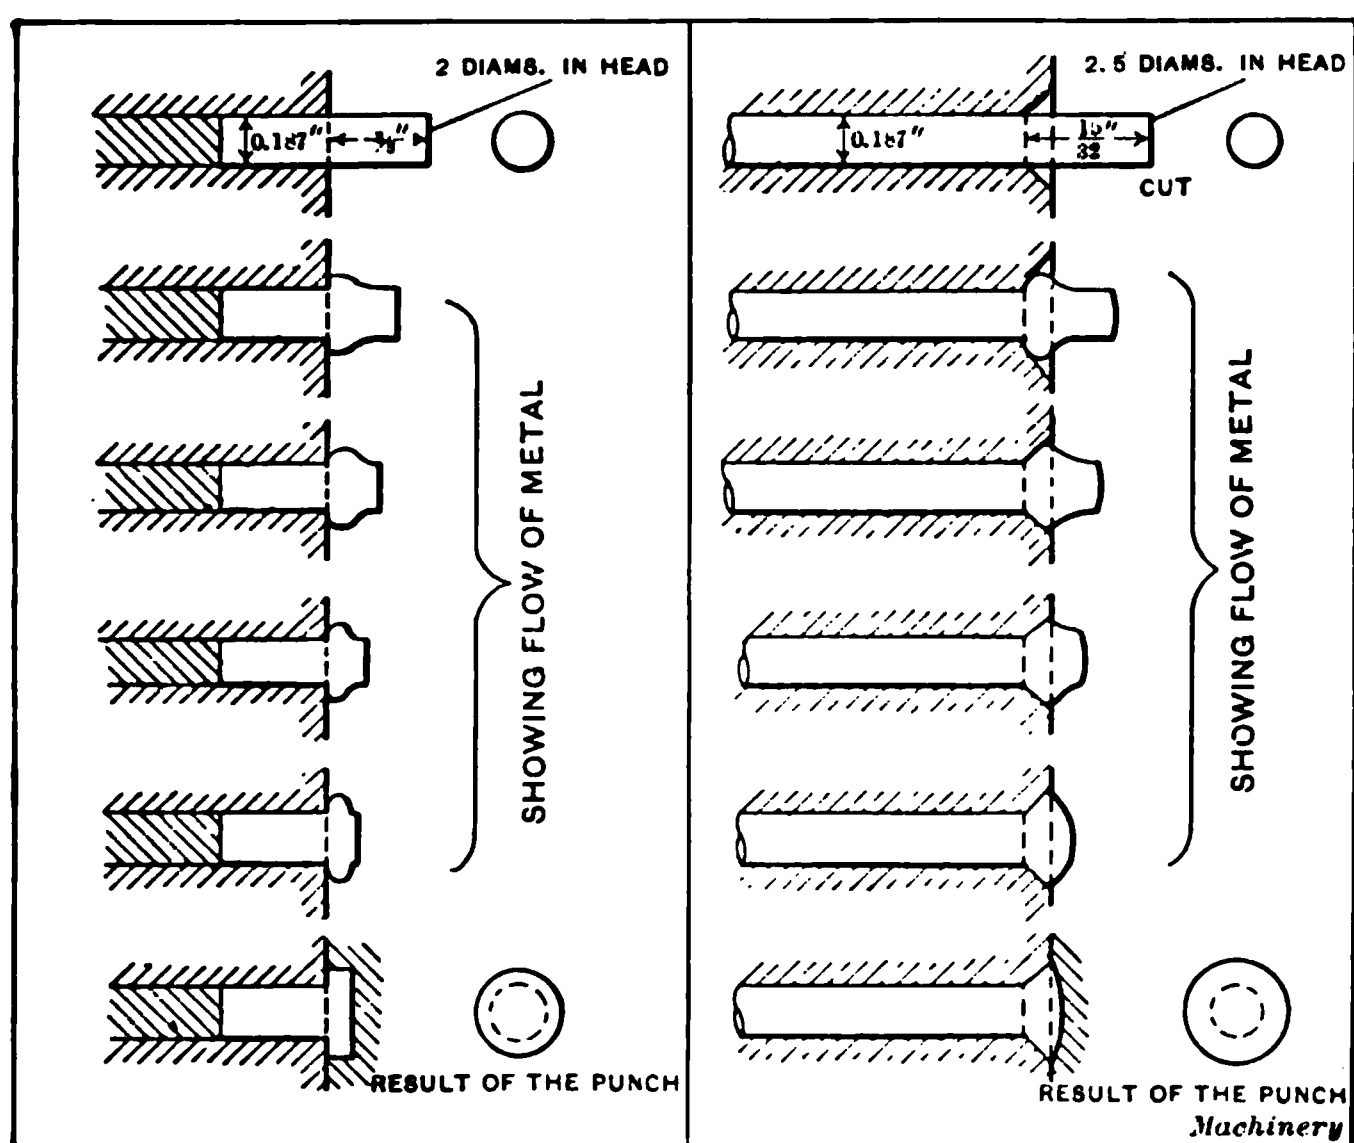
Evolution of Screw Blanks made on Single-stroke Cold-headers
